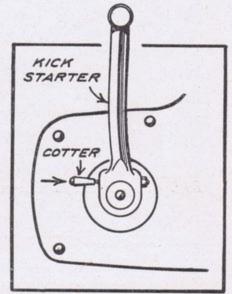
Note that the PIN COTTER HOLDING THE KICK-STARTER CRANK MUST BE INSERTED FROM THE LEFT.
